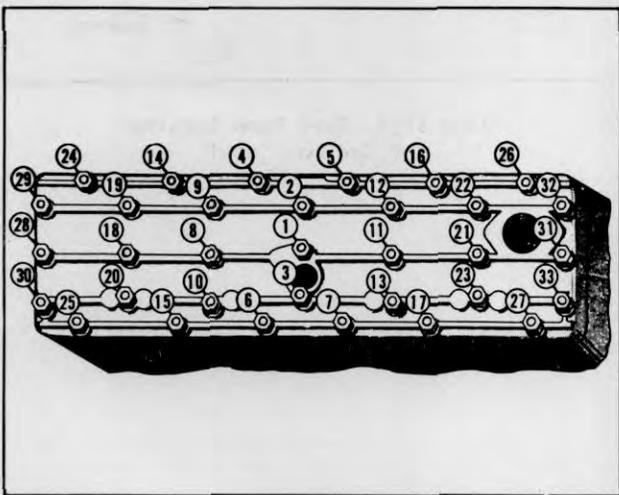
Cylinder Head Stud Nut Tightening Sequence
